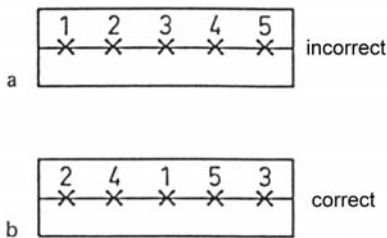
Tack welding. The numbers indicate the sequence of welding.
